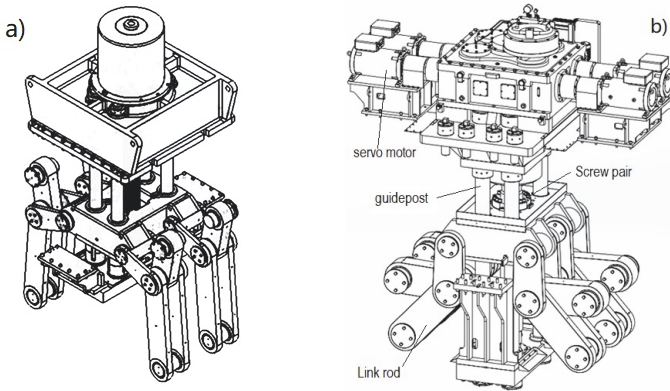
Main drive system of a digital servomechanical hot stamping press with single motor drive (2a) and multi-motor parallel drive (2b)
